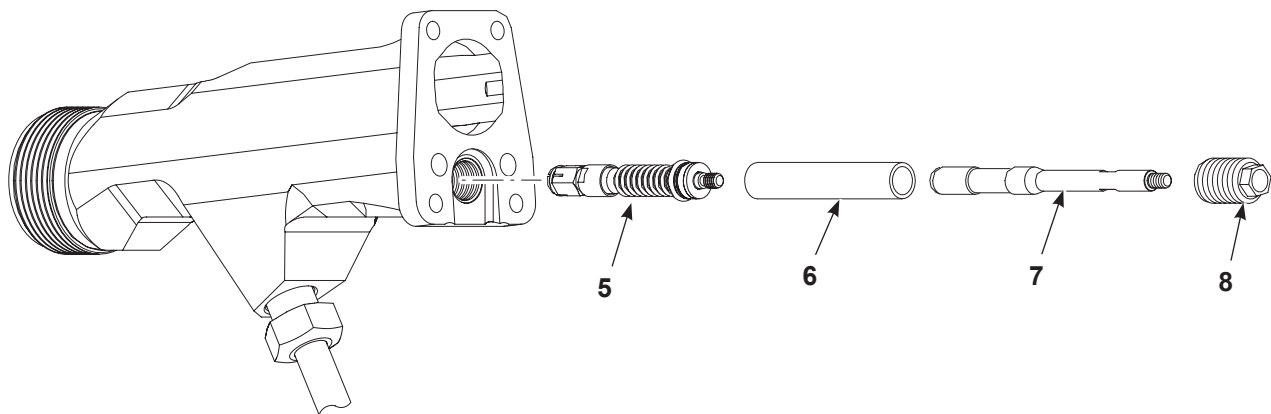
Packing Cartridge Replacement - Removing Cartridge From Extension and Pull Shaft
